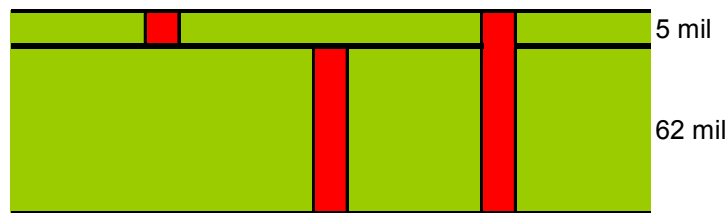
Cross-sectional view of the multilayer PCB built on FR4. The vias are shown in red.
